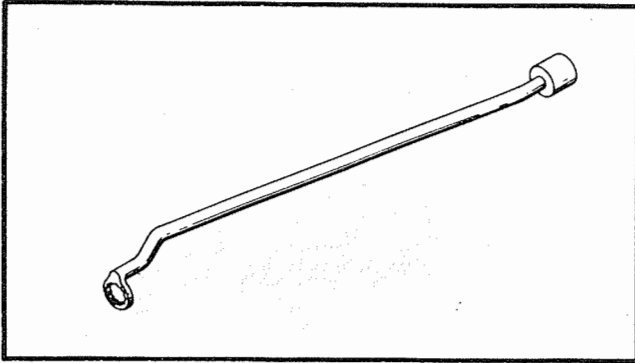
Exhaust Pipe Clamp Bolt Nut Wrench
